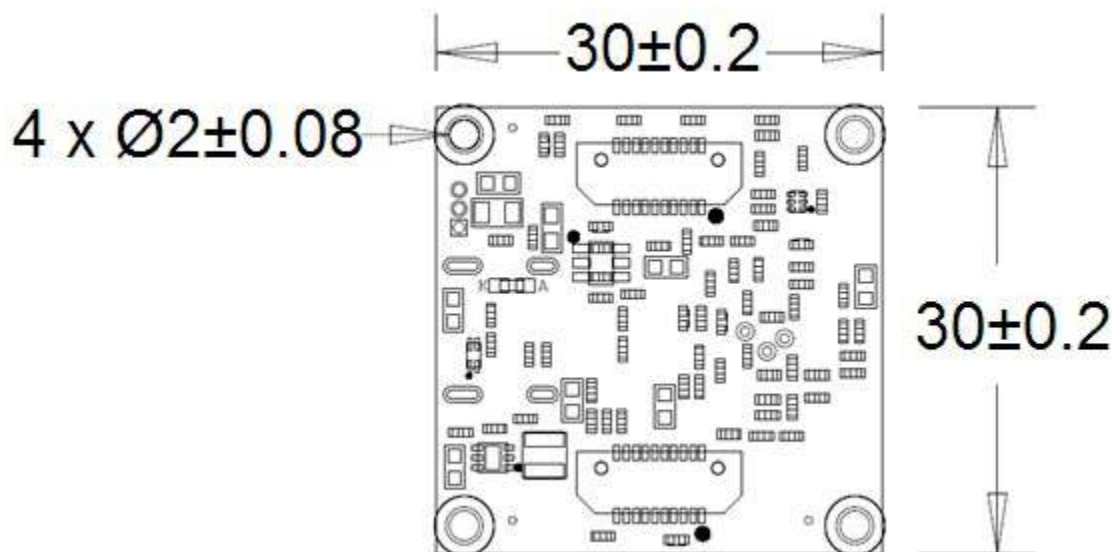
Front Portion of See3CAM_CU135 Base Board Mechanical Dimensions
